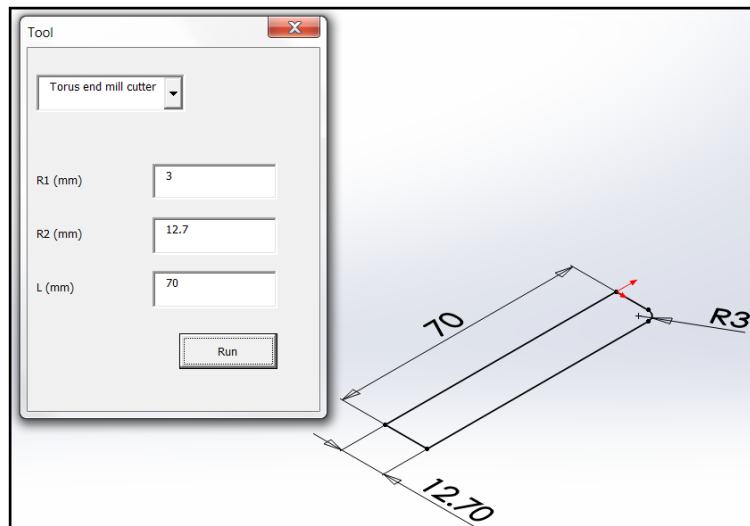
Sketch to generate torus end mill cutter using macro.
